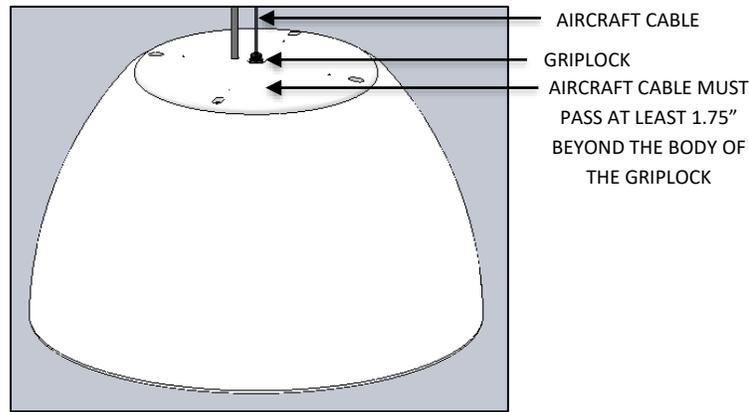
AIRCRAFT CABLE INSTALLATION
